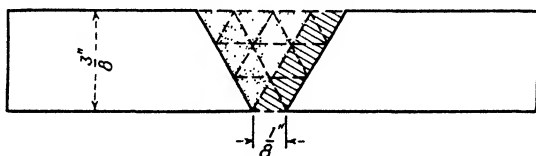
Note the increase in volume of weld metal required to make this joint, caused by cutting out $\frac{1}{8}$ in. more metal than was required to vee out the crack perfectly.
